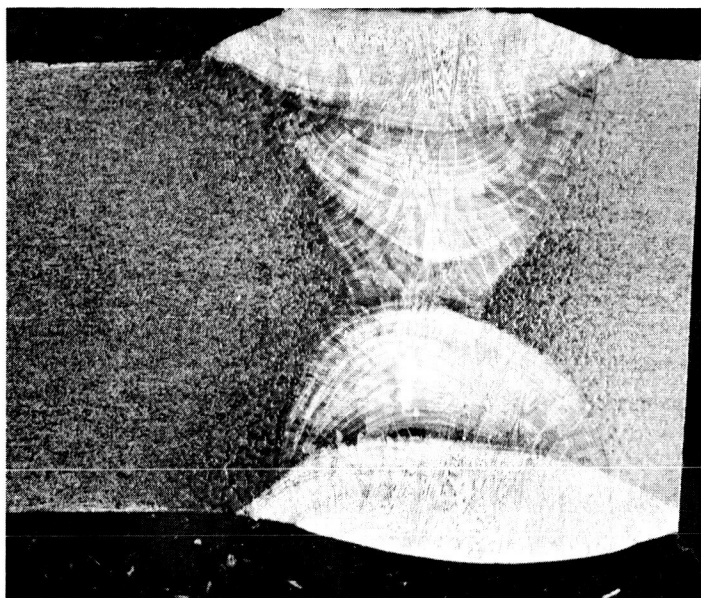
Plate Butt Weld Joint Configuration
